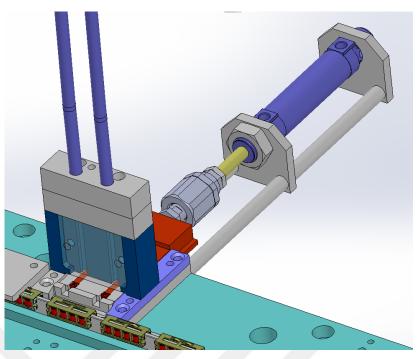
Design of 2nd Ø6 mm Roller Assembly Machine
